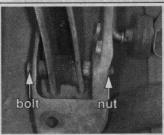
Remove the mounting bolt connecting the lower control arm to the suspension crossmember
